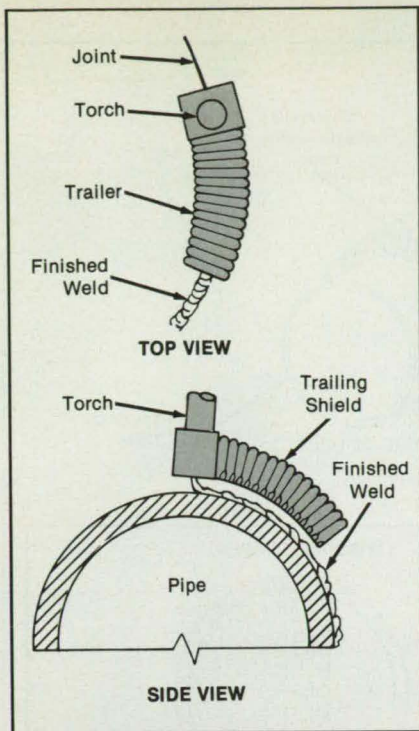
The Welding Torch Pulls a Trailing Shield behind it to provide a protective shield of argon gas over the hot weld bead. A guide at the front of the torch holder feeds welding wire to the joint.
